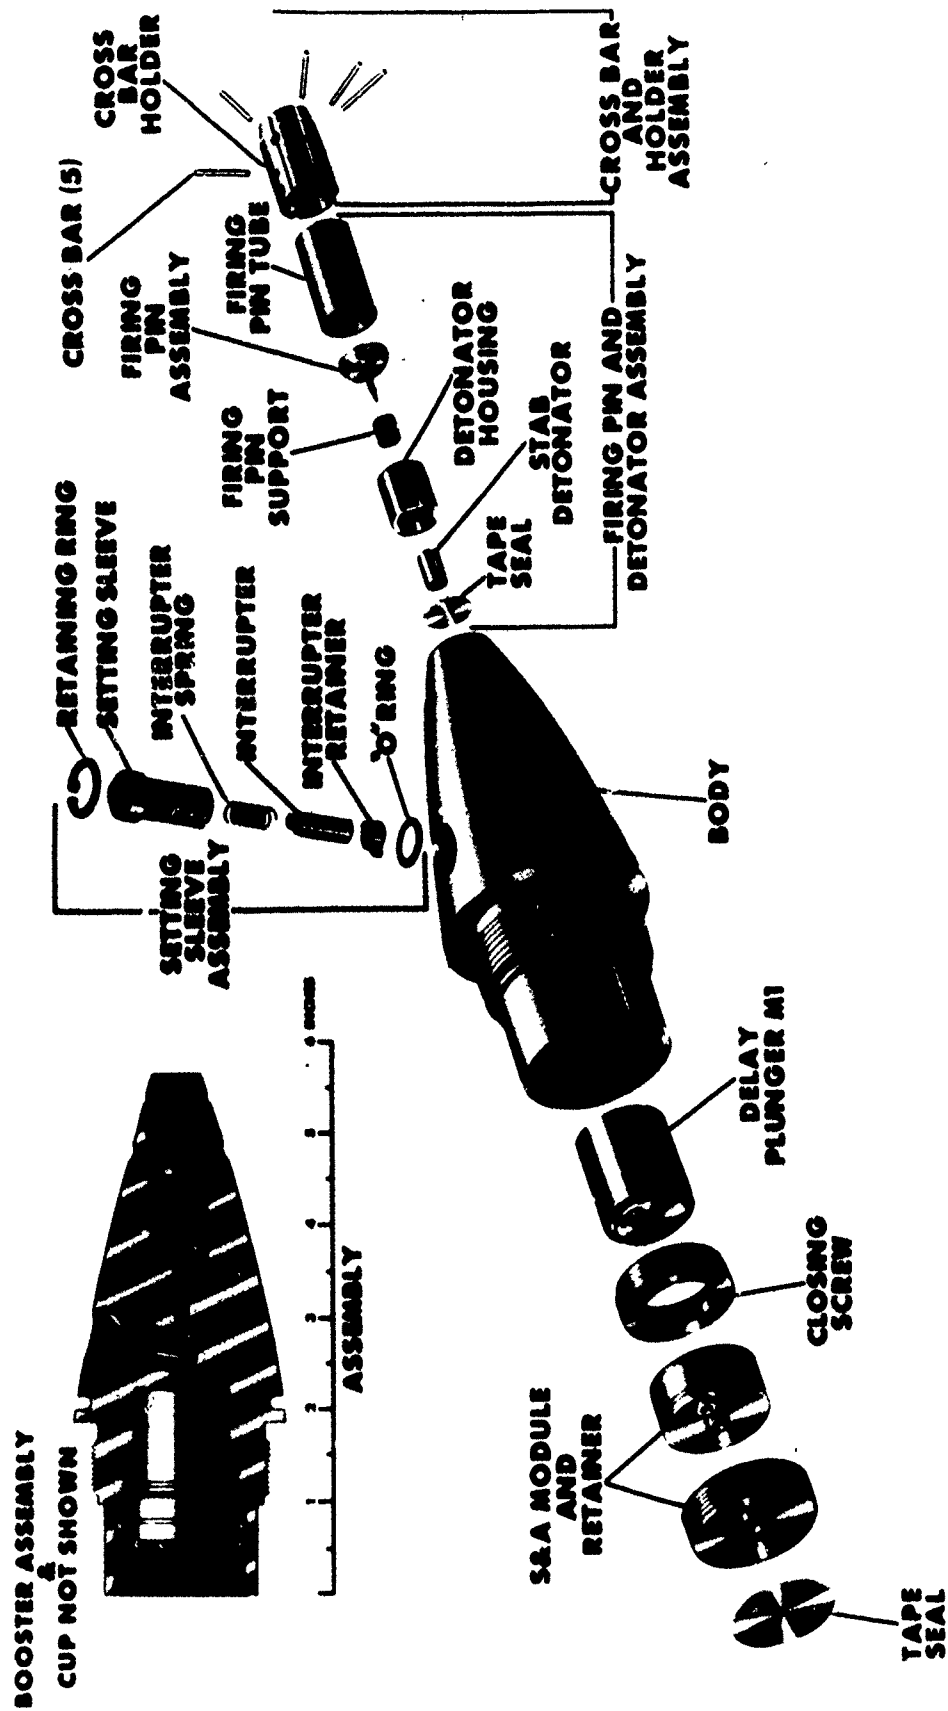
FUZE, PD, M739, EXPLODED VIEW
